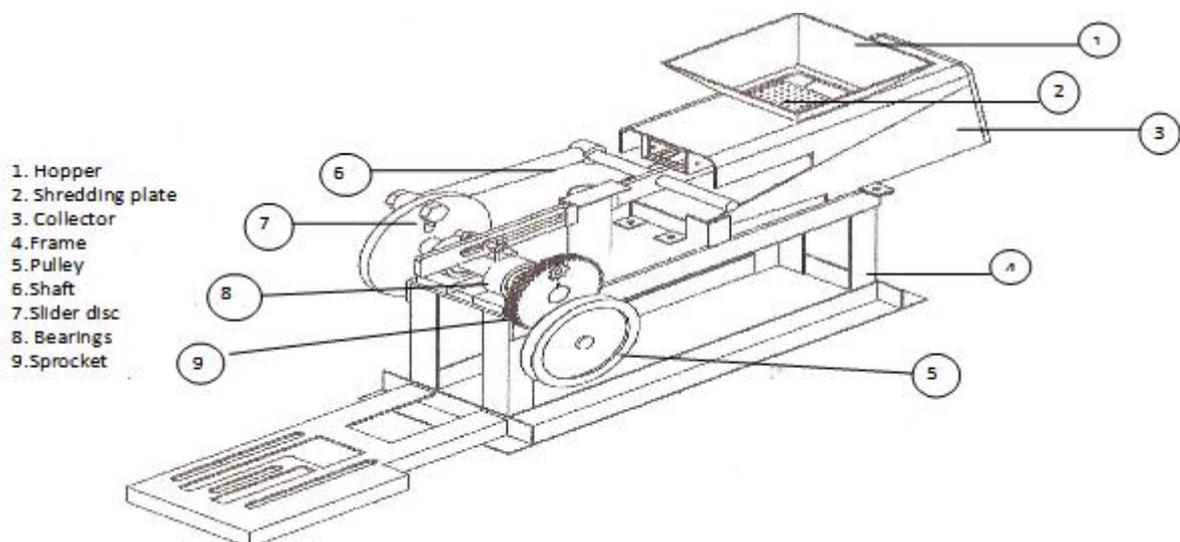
Isometric Drawing of the Cassava Shredding Machine
